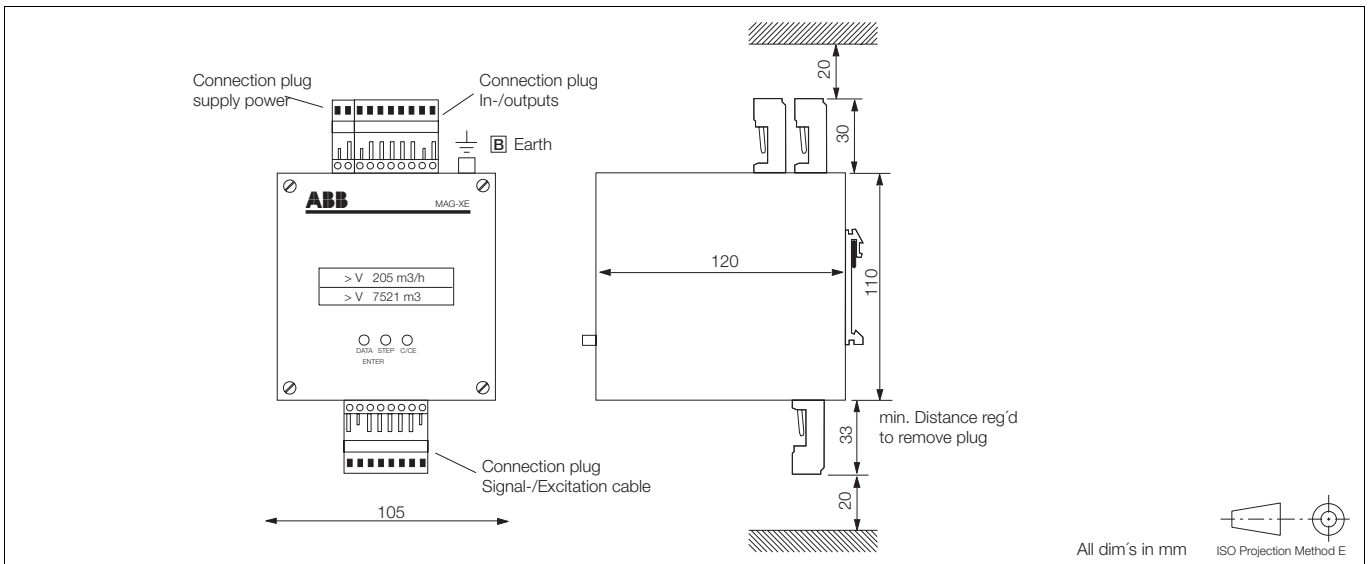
Dimensions Converter for Model DE48 Installed Inside the Ex-Zone.
